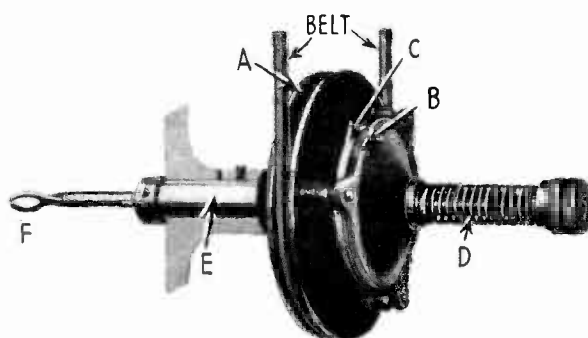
A SLIPPING CLUTCH AIDS IN WINDING UP FILM.
